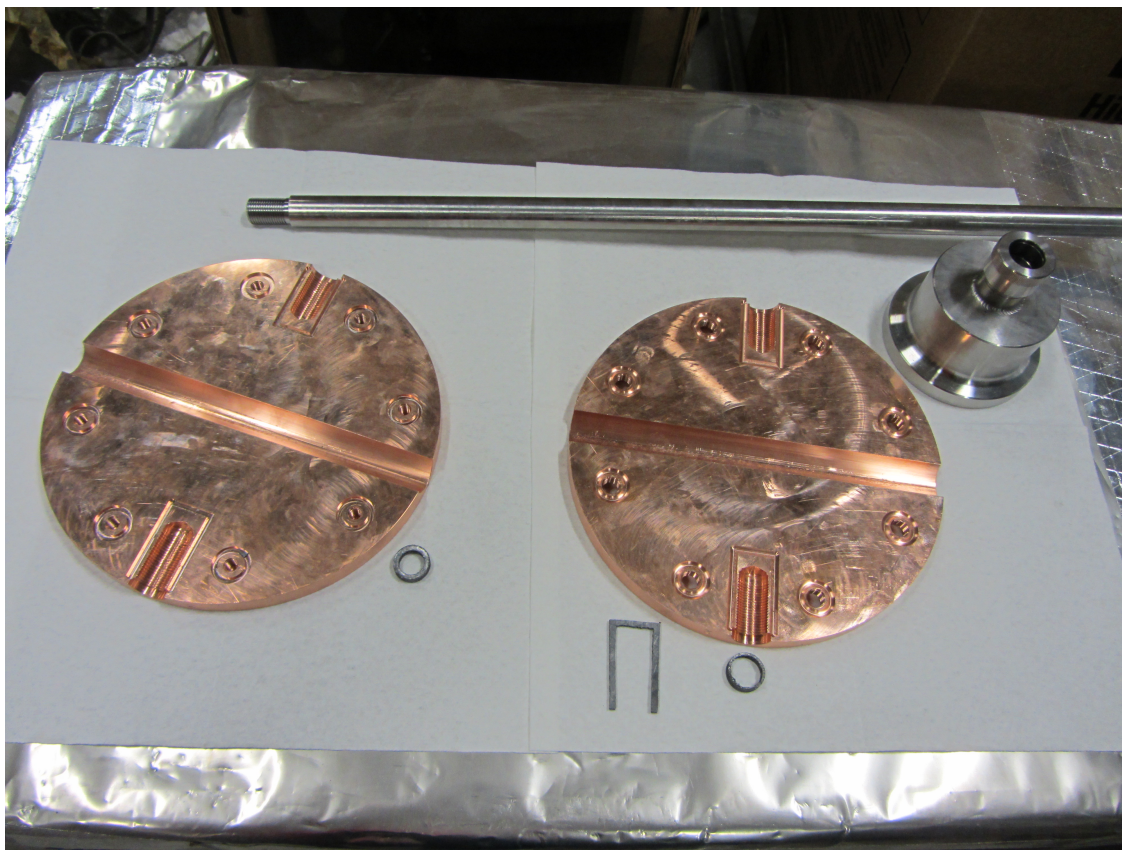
All of the components used to construct the center disk; Two mating halves of the center disk with gaskets, supporting rod, and Grayloc cap.
